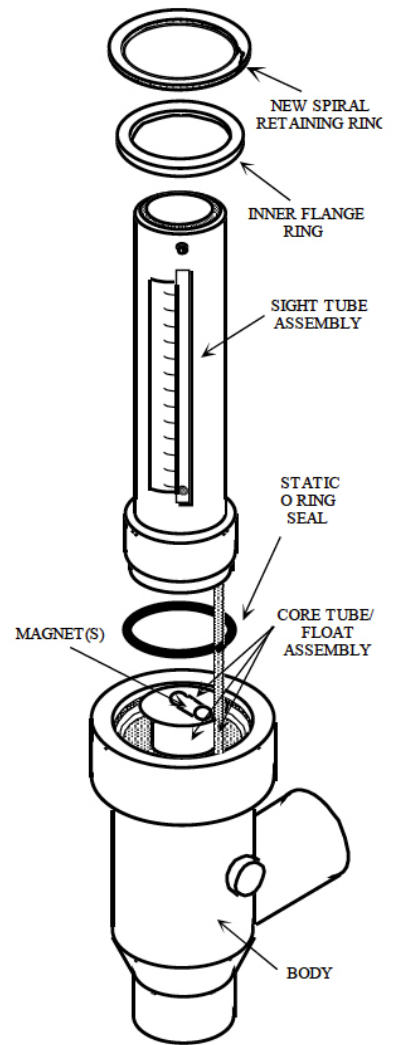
Partially exploded drawing of the MEMFlo SteamFlo Flow Meter
